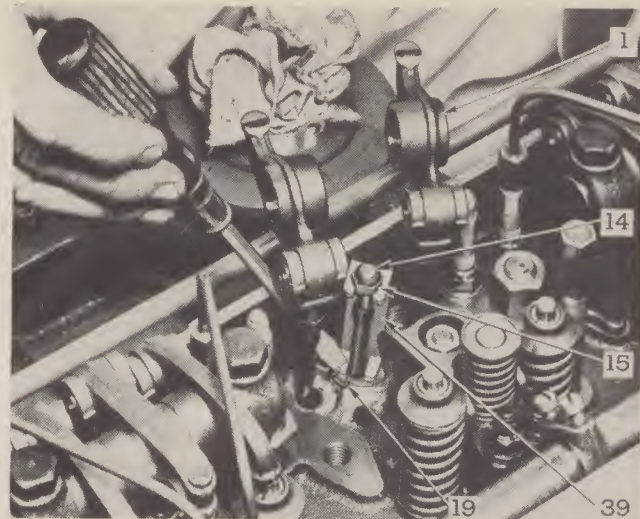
B—A GM engine showing method of renewing valve springs without removing the cylinder head. Piston is at TDC.
